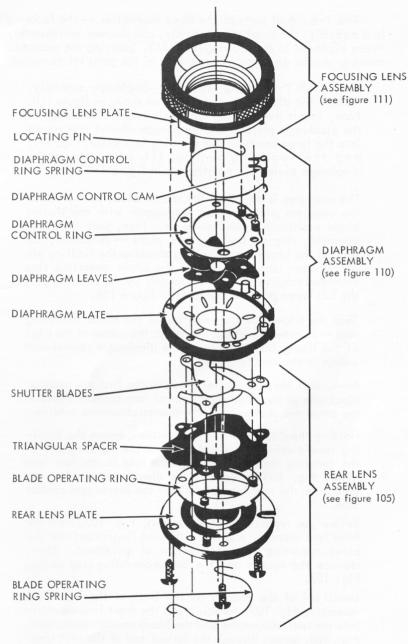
EXPLODED VIEW OF FRONT LENS ASSEMBLY
